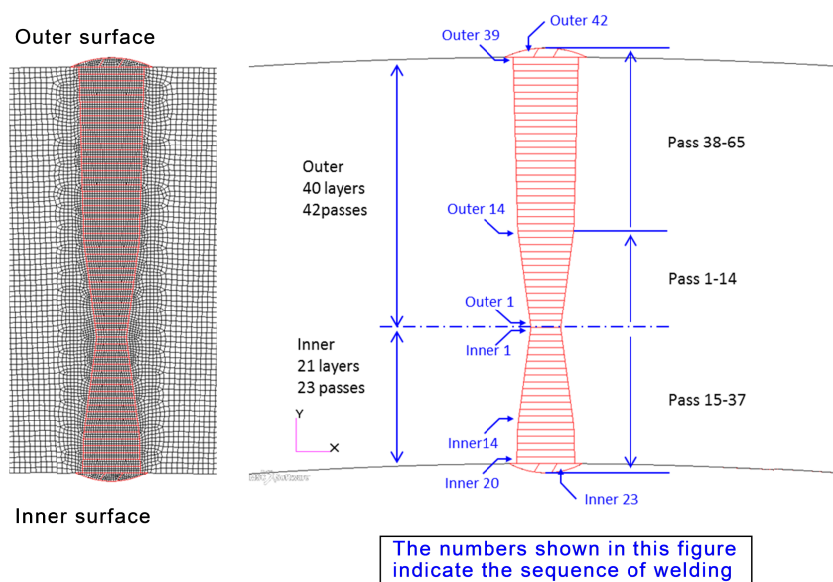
Modeling of Weld Passes (joint welding).
